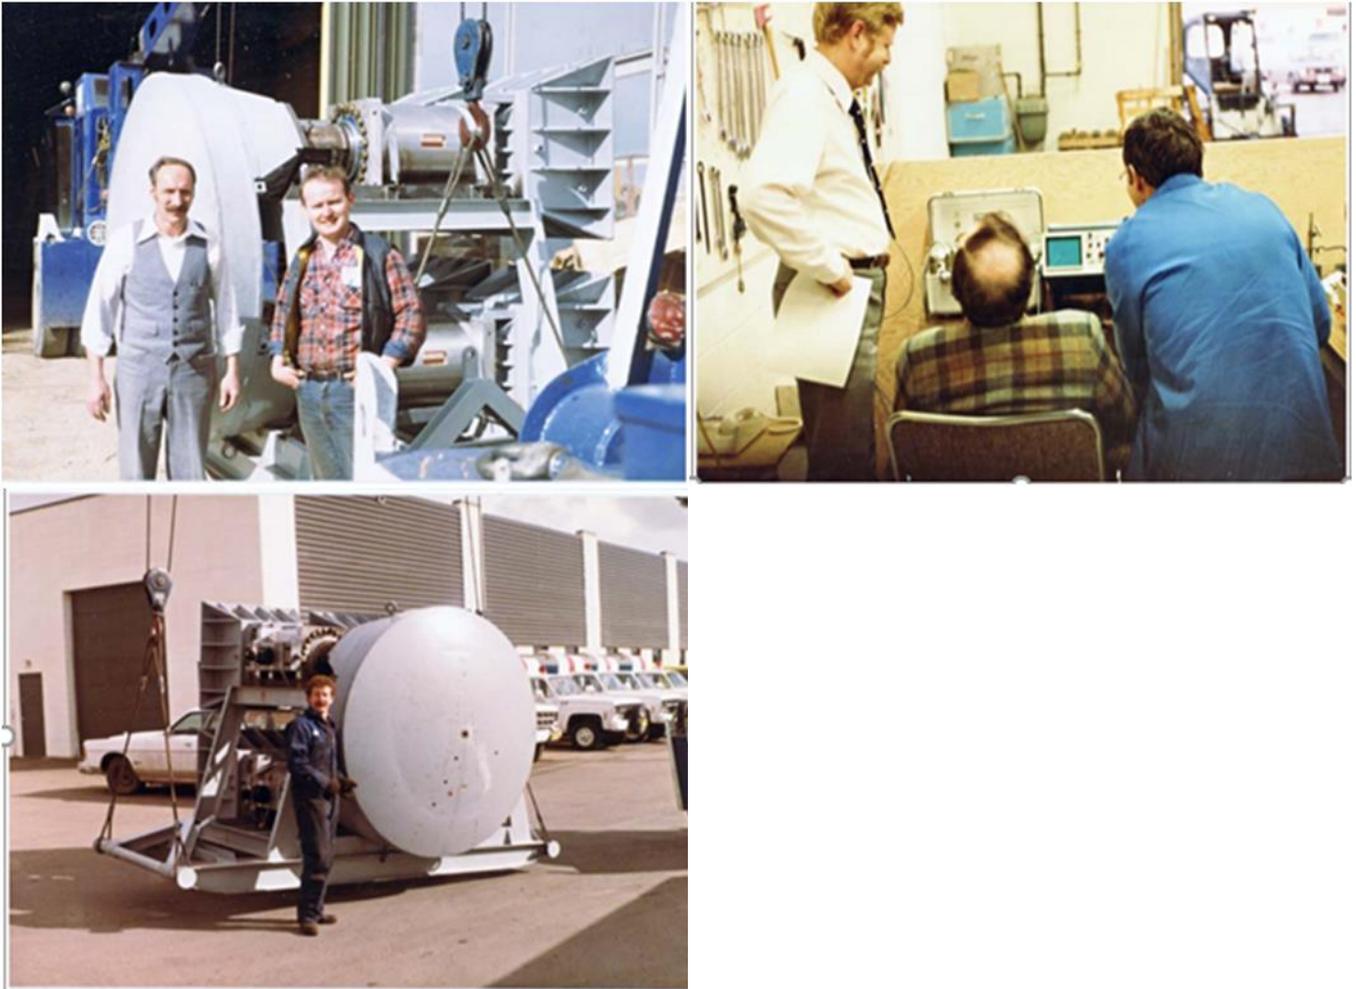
Shop Testing of Assembled Indenter Equipment in Calgary
